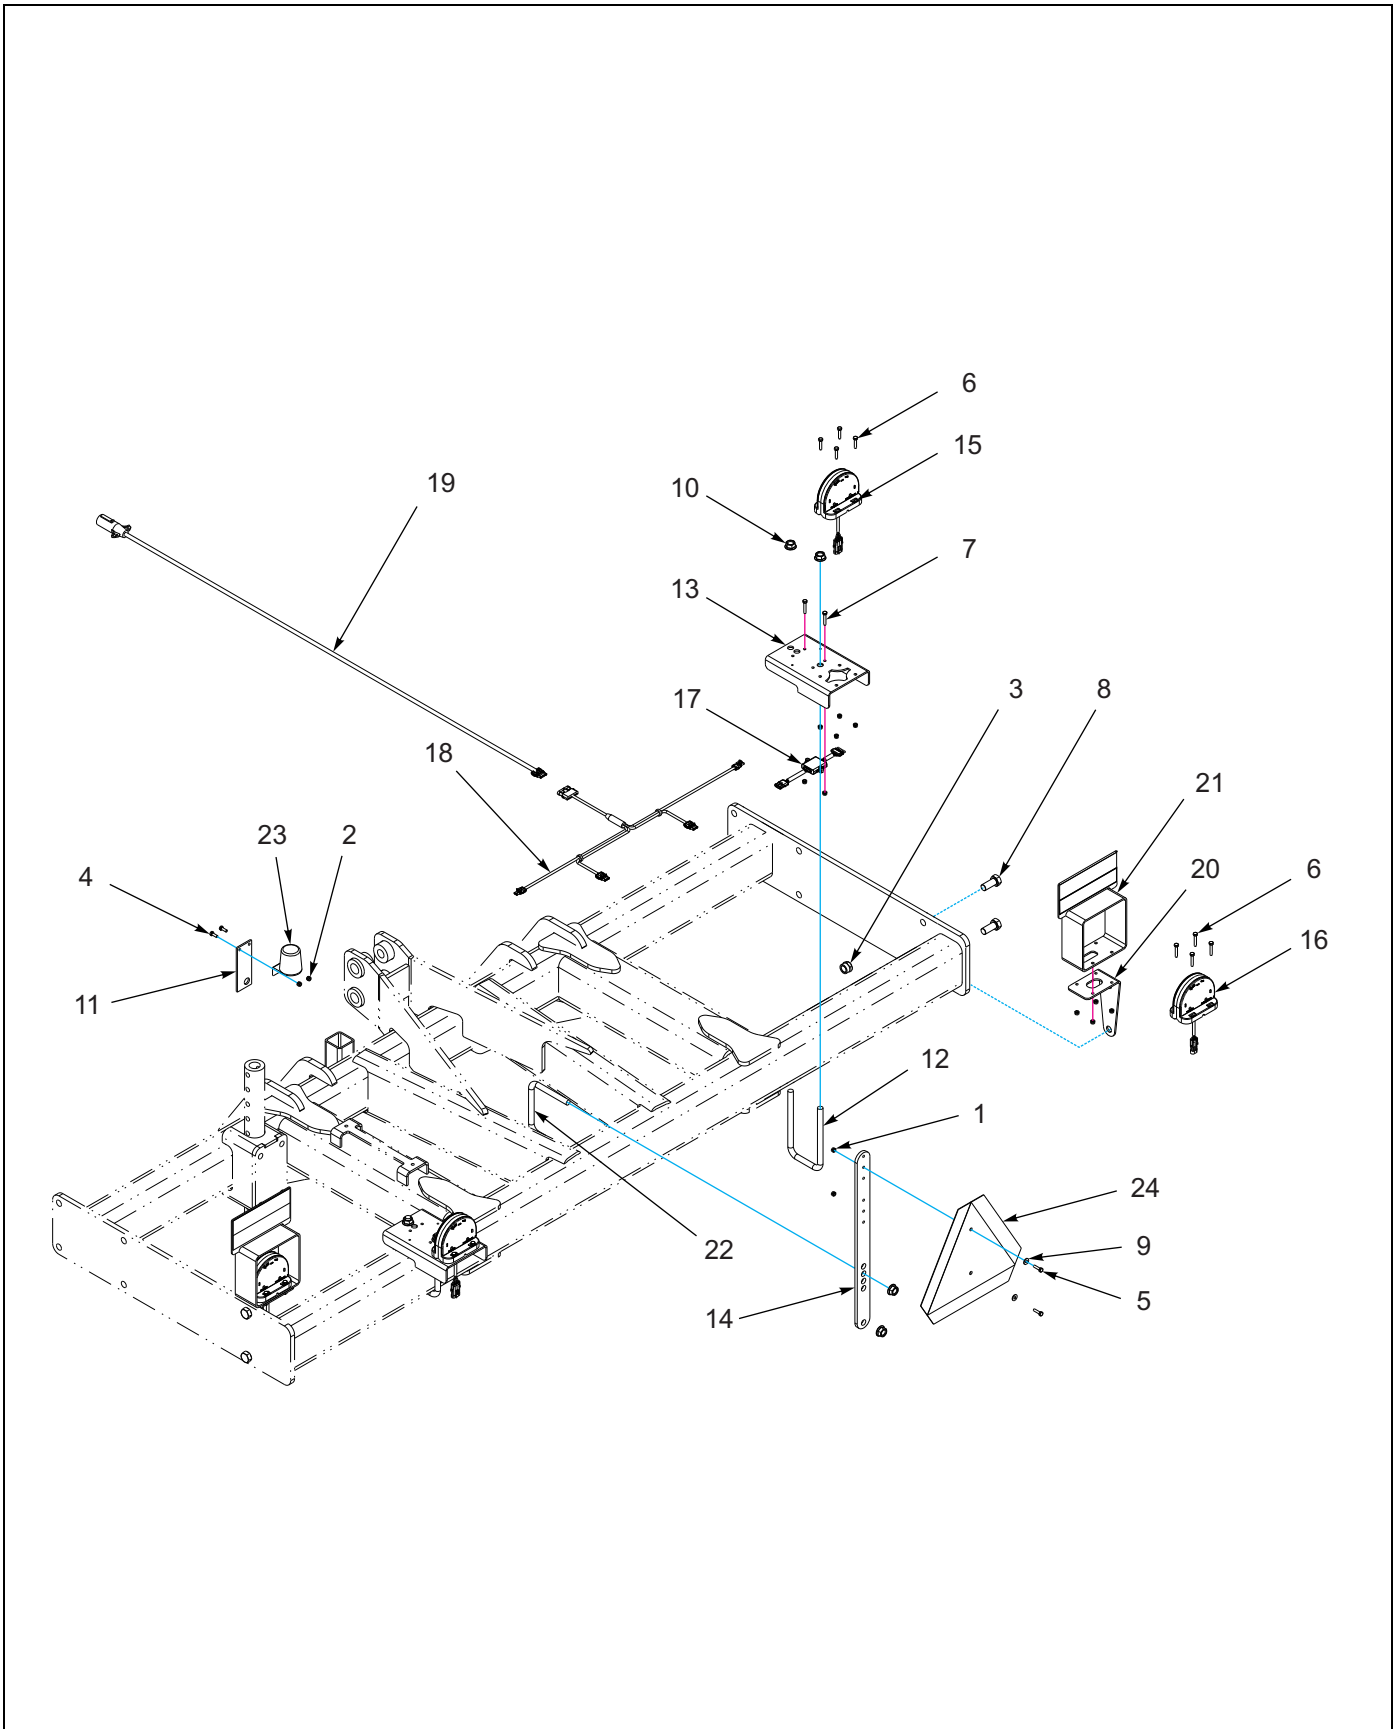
Electrical Assembly - Narrow 3 & 4 Shank
